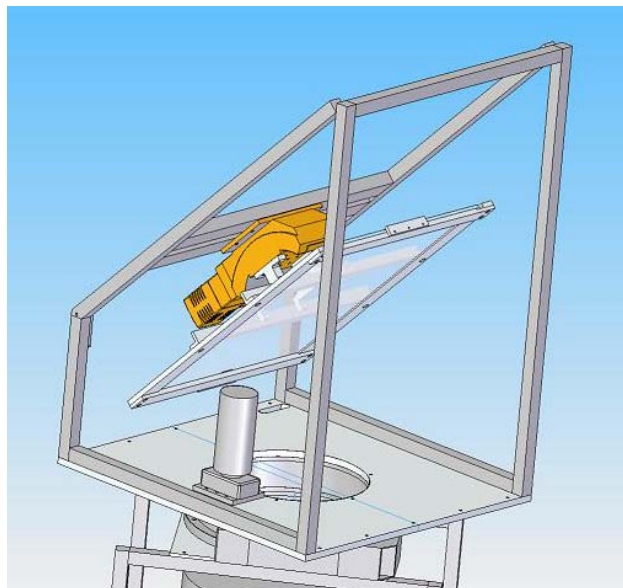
Turret assembly showing the motion controlling stage and cradle motor.
